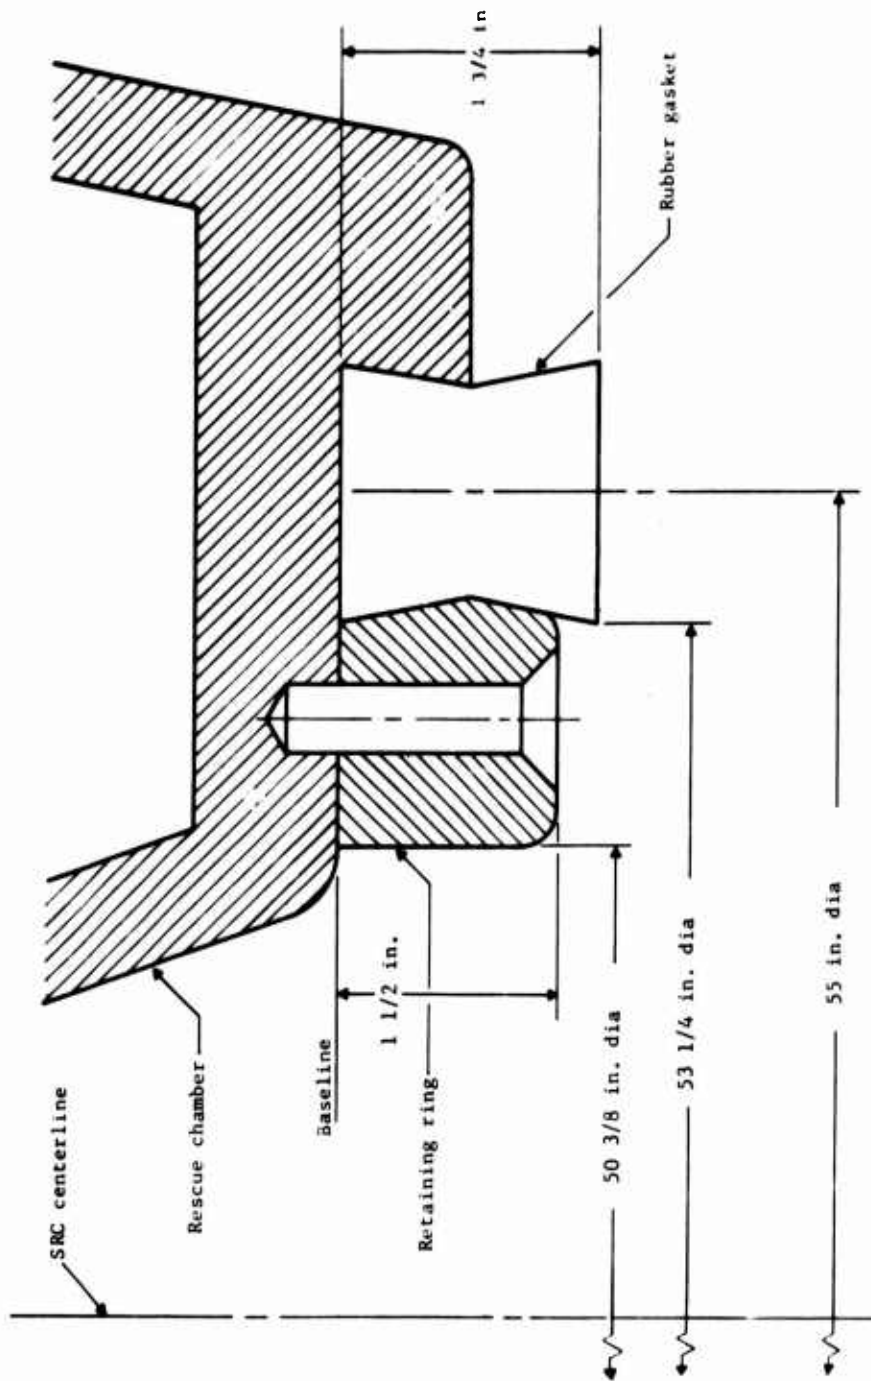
SRC MATING SURFACE DETAILS
